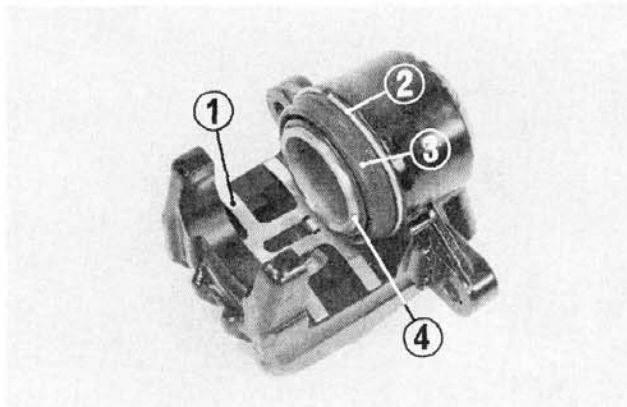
① Pad spring ② Boot clip ③ Piston boot ④ Piston
